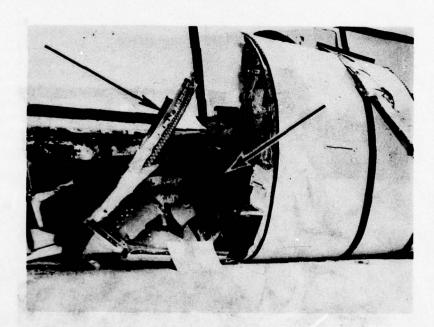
CH-47A Crash Test - Details of Torque Box Structural Failures at F.S. 482.
